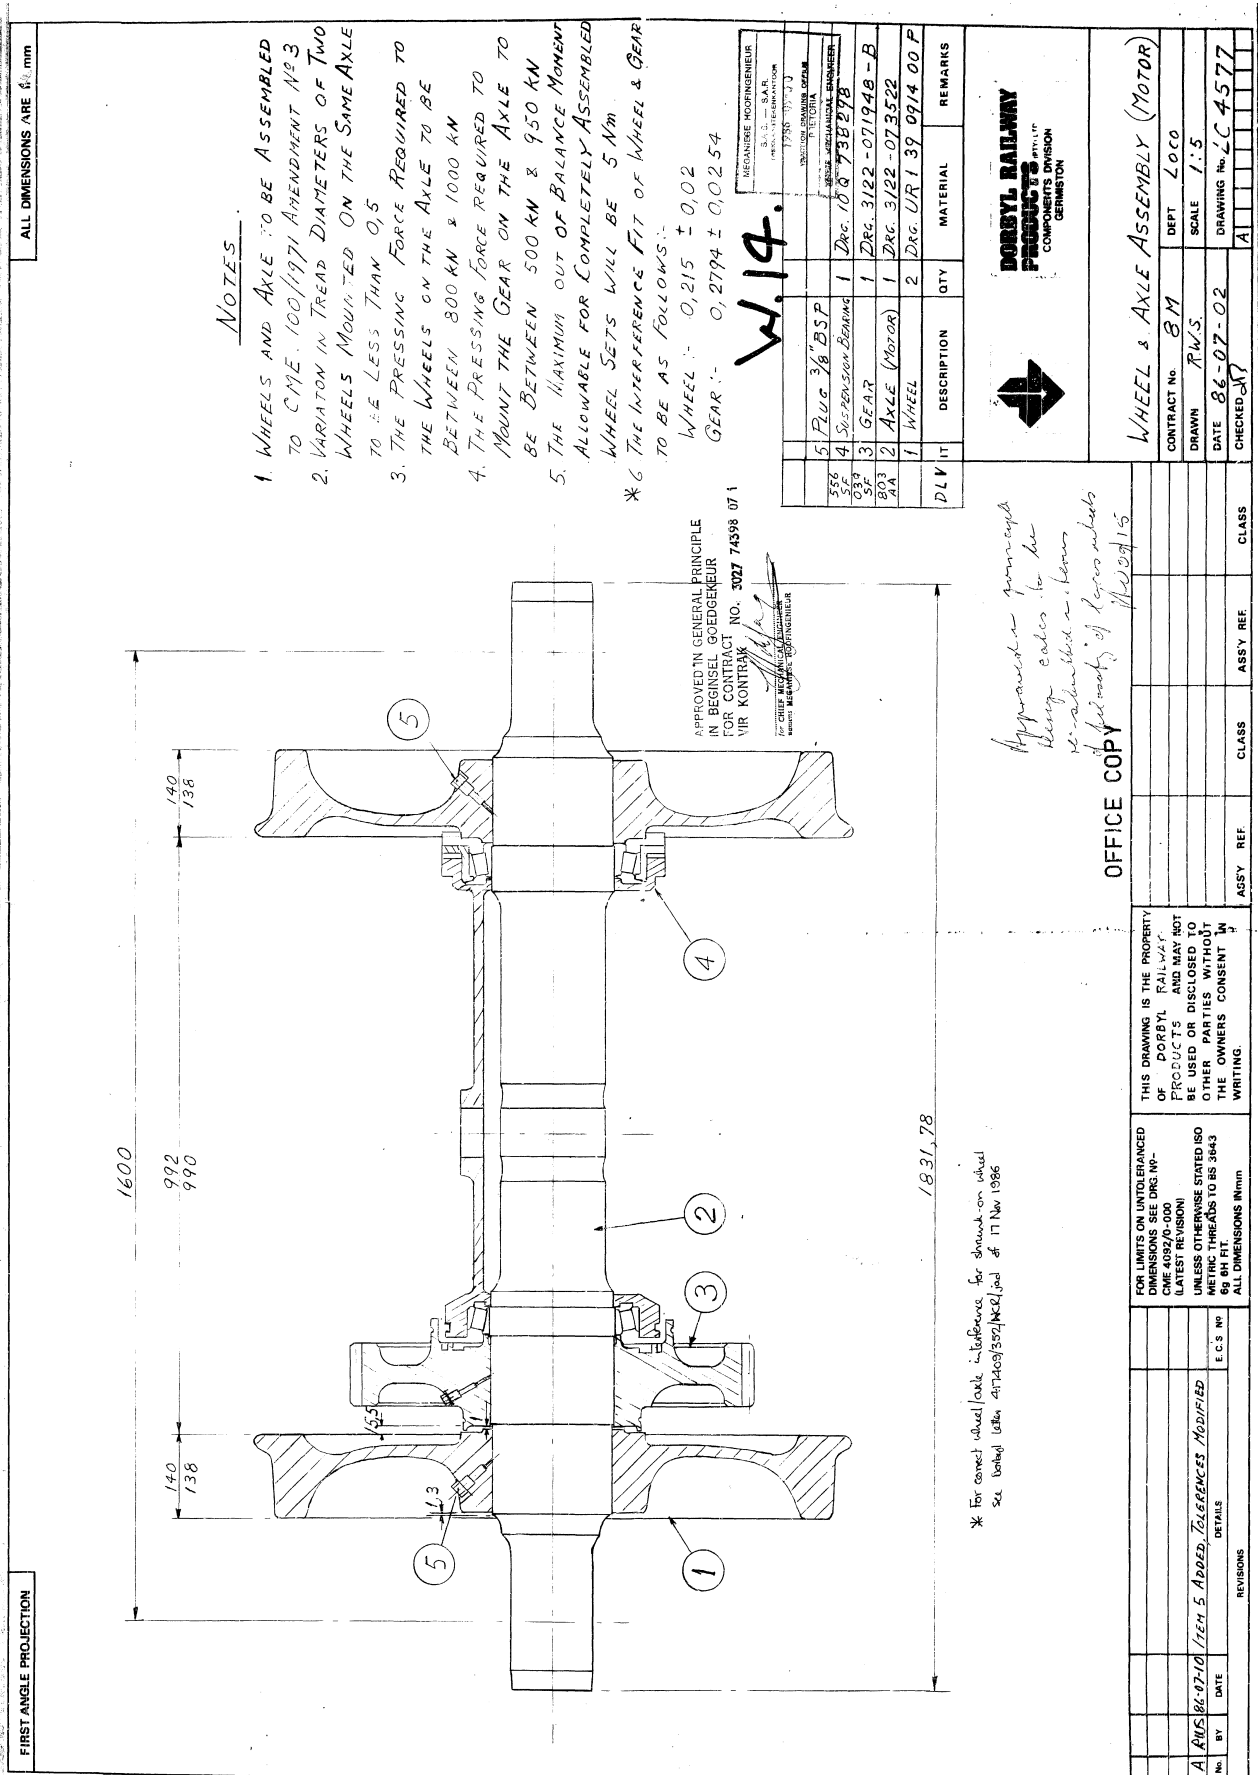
Assembly engineering drawing of a Motor Coach wheel set [33]
